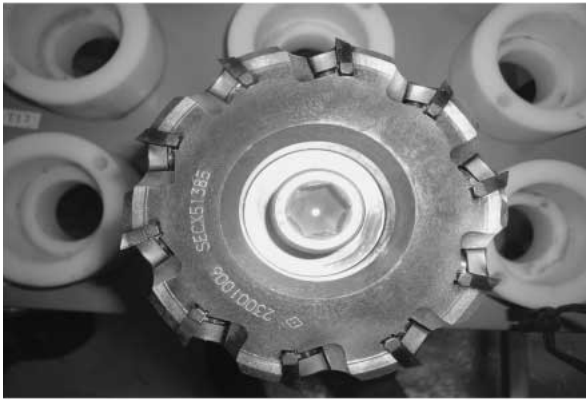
Fabricated Face-mill Cutter with Optimum Specification
